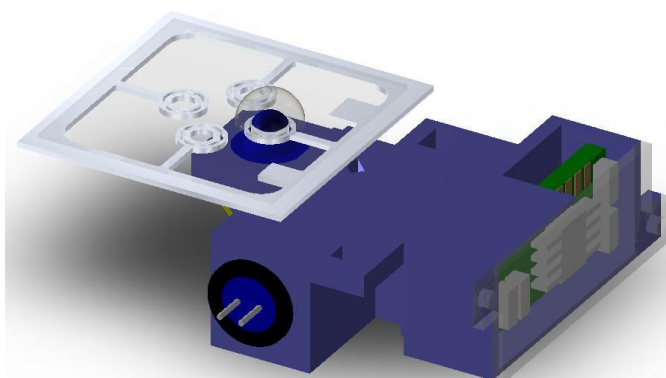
ENTIRE VIEW (CAD DRAWING) AT THE FLUORESCENT OPTICAL SYSTEM PLACED UNDER THE PCR CHIP WITH VRC
